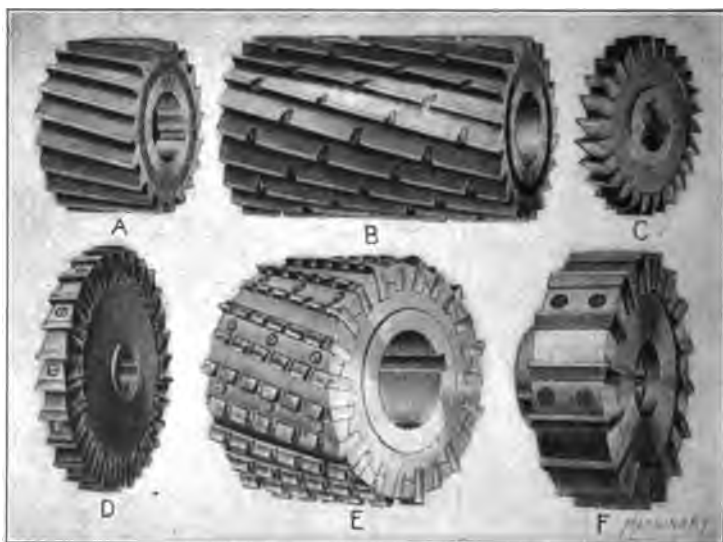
Cylindrical, Side, and Face Milling Cutters
